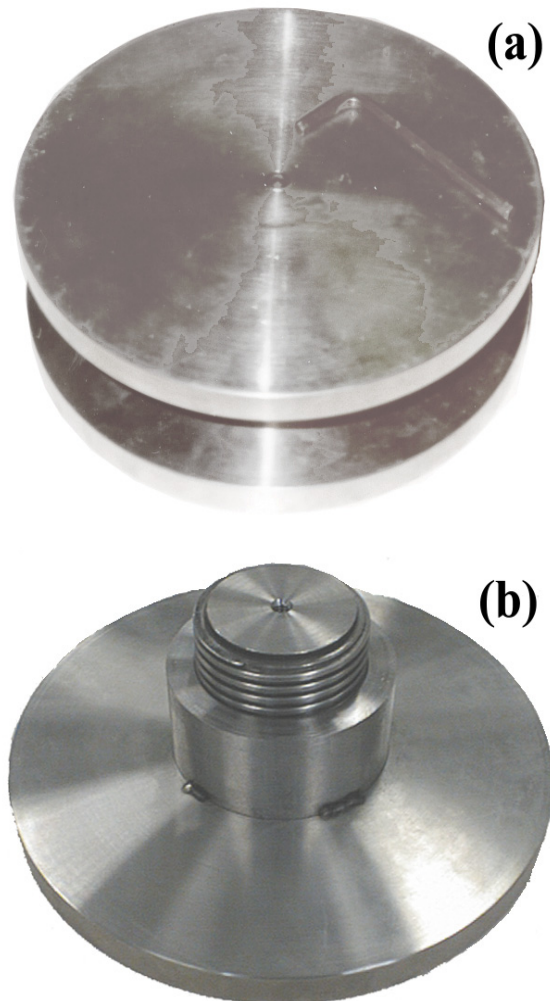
Adjustable height spacer (a) assembled, (b) disassembled.
